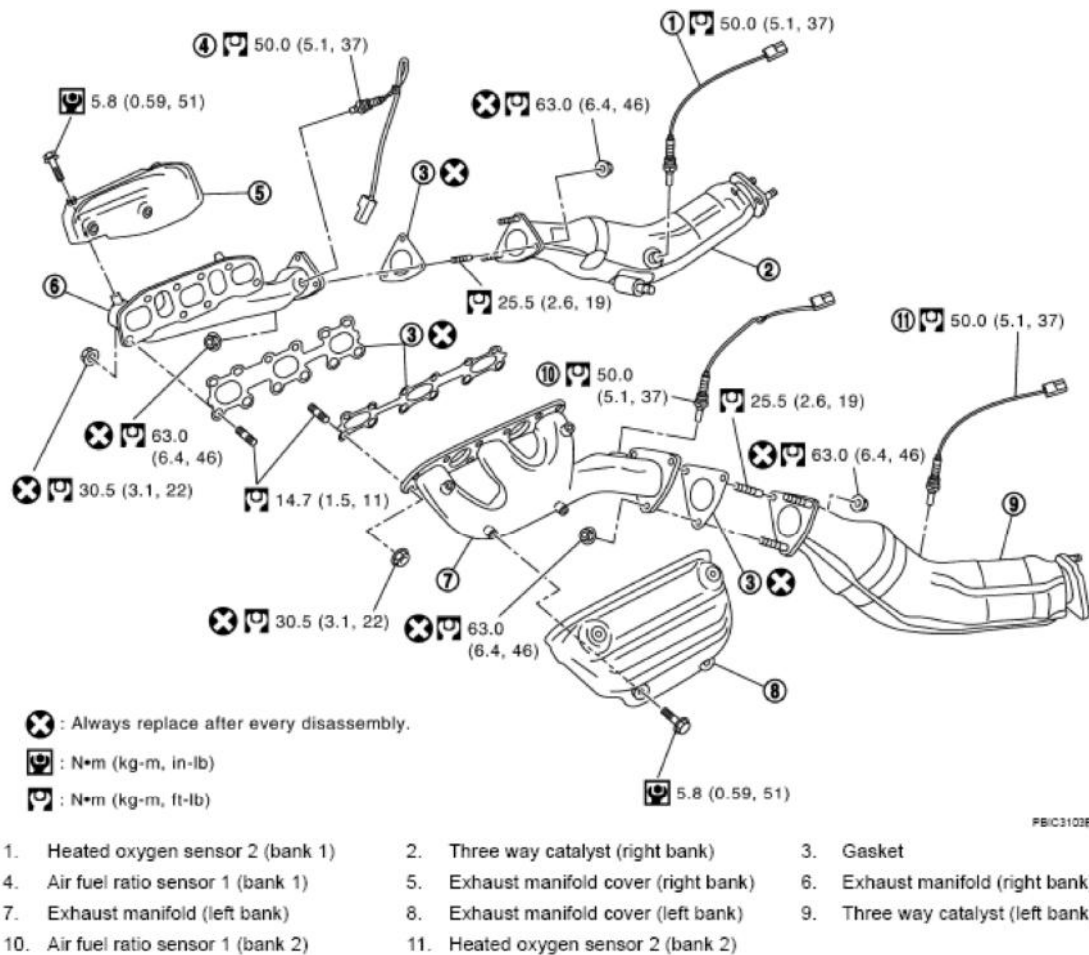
Identifying Exhaust Manifold And Three Way Catalyst Components With Torque Specifications
